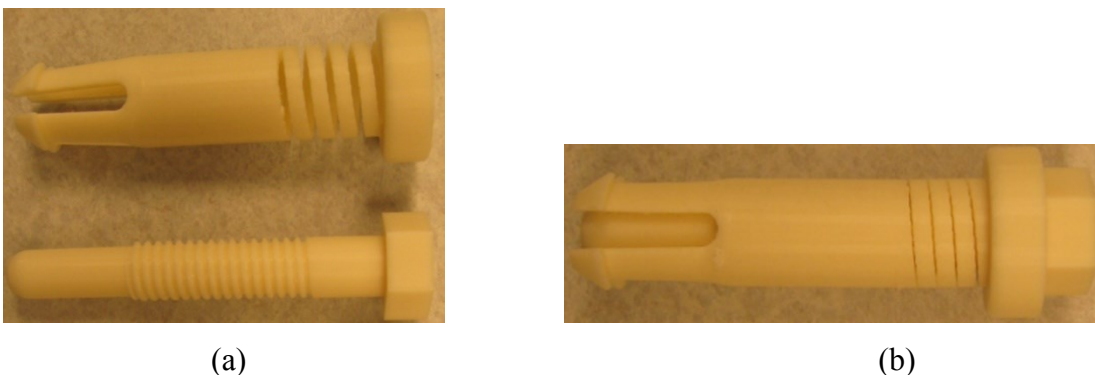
A rapid prototype of the designed temporary fastener: (a) unassembled model and (b) assembled model
